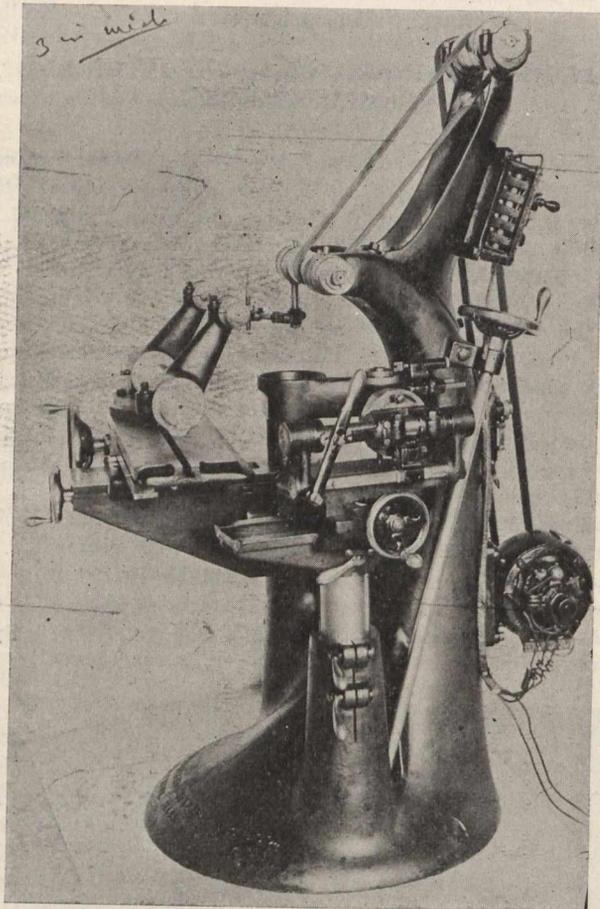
No. 1. Fourteen-inch Cutter and Reamer Grinder (Motor Drive).
